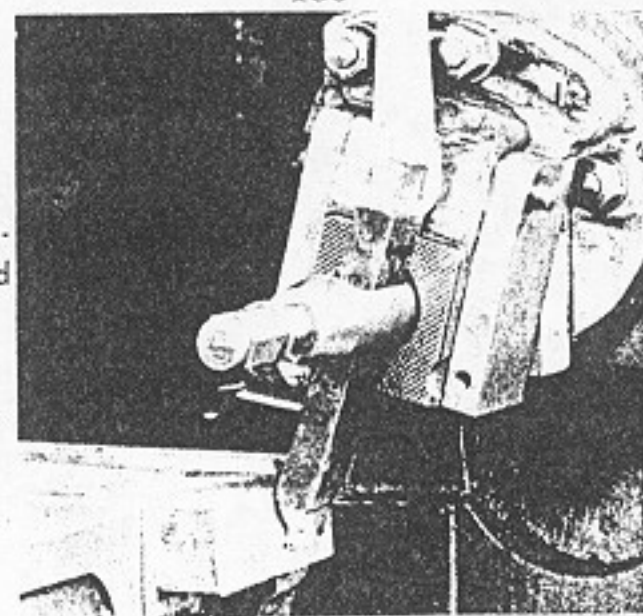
Vertical surfaces are shaped by feeding the tool slide manually. (Courtesy Cincinnati Shaper Co.)
